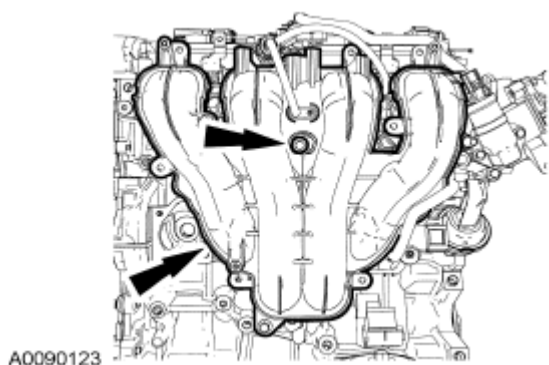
Locating Intake Manifold Gaskets & Intake Manifold
